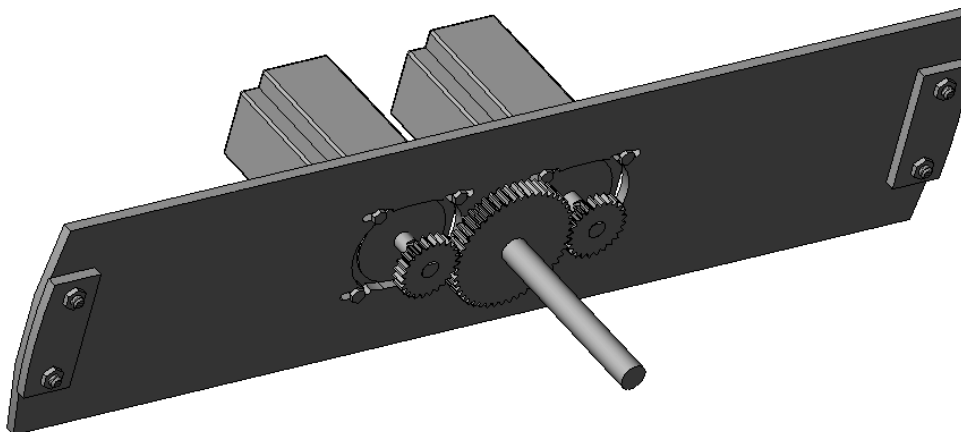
Stepper motors bolted to mounting plate, driving the displacer shaft at 2:1 reduction ratio
